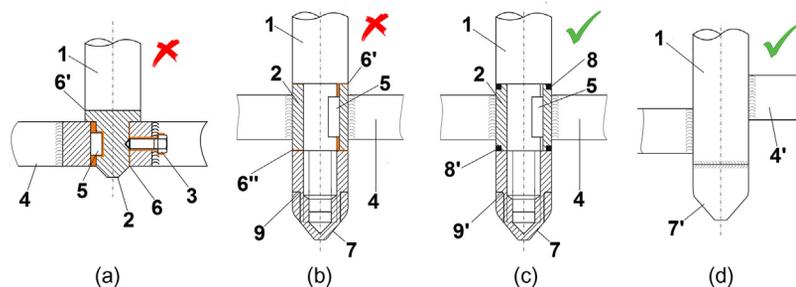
(a) The hub (2) is secured to the shaft (1) by means of a screw (3), which is exposed to product that may collect in and around the screw head. The hub-to-shaft connection gives rise to a metal-to-metal joint (6') that may permit the ingress of product and bacteria. Agitator blades (4) should be welded to the hub, although screw connections are sometimes observed. These exposed screw heads (even bolts with dome head nuts and washers of suitable food grade material) again will create a food safety hazard, and the blade-to-hub connection gives rise to a new metal-to-metal joint (6). To avoid the latter problem, the joint between the blade and the lug on the hub can be sealed by a thin gasket. Keyways (5) exposed to product are not recommended, because product and microorganisms may be retained in the keyway. Keyways may require additional design and/or cleaning practice to ensure drainage and cleanability, e.g. spray ball and wand additions, increased CIP flow and adjusted spray coverage. (b) Once the hub (2) is secured to the shaft (1), an end cap (impeller nut, 7) is screwed on the interior male thread end of the shaft. The non-welded impeller hub-to-shaft and hub-to-end cap connections give rise to crevices and metal-to-metal joints (respectively 6' and 6'') that may allow the ingress of product and bacteria. In that way, the keyway (5) also may retain product and microorganisms. The sharp corners of the spanner flats (9) on the end cap may be difficult to clean. (c) Food quality gaskets under controlled compression respectively may seal the propeller hub to the shaft (8) and to the end cap (8'). Keyways (5), where employed due to mechanical design considerations, shall have edge radii not less than 3 mm. The corners of the spanner flats on the end cap have been radiused (9'). (d) An all-welded impeller assembly (e.g. hubs, blades, end cap) is still preferred. Impeller hubs welded to the shaft are preferred over removable hubs. The designer may omit the hub and immediately attach the blades to the shaft by welding (4'). Finally, the end cap can be welded to the shaft (7') (CFCRA, 1997; Lelieveld et al., 2003; Hauser et al., 2004b; ASME, 2009).
